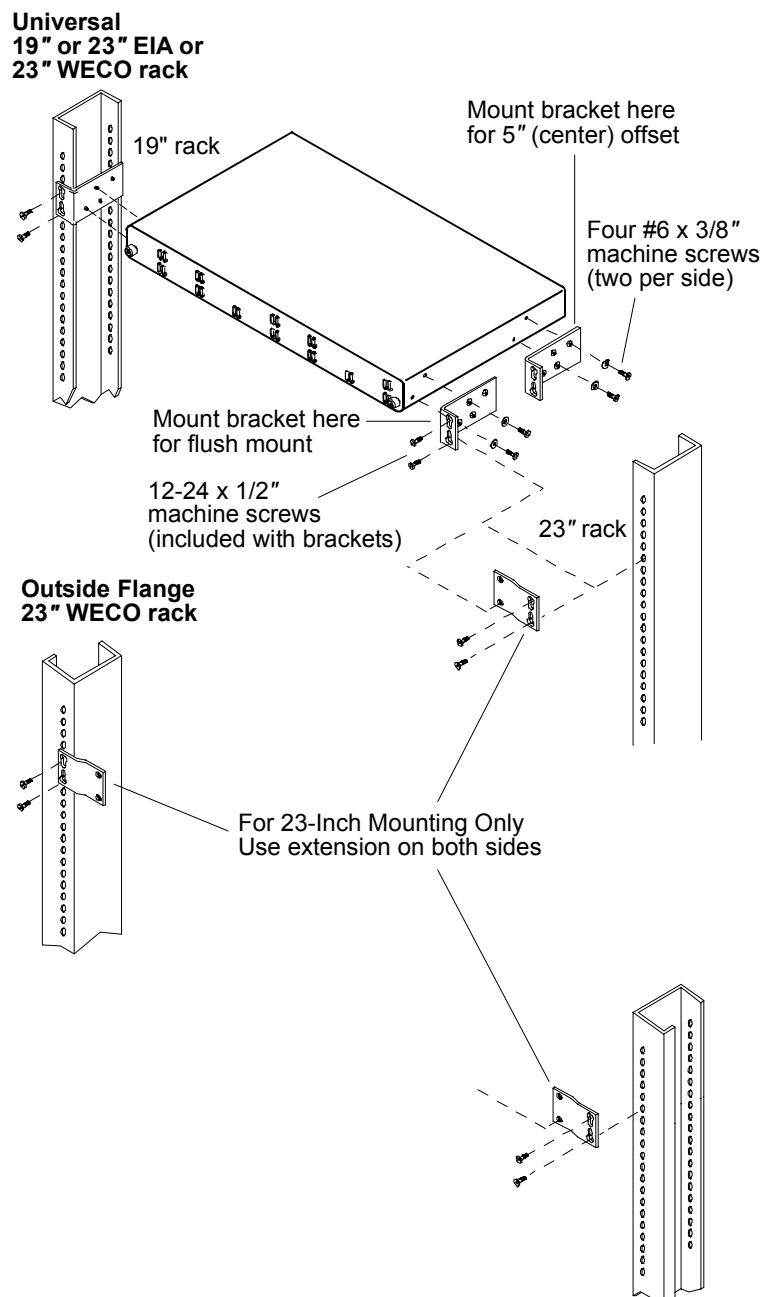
Attaching Brackets to 19-inch or 23-inch Racks
